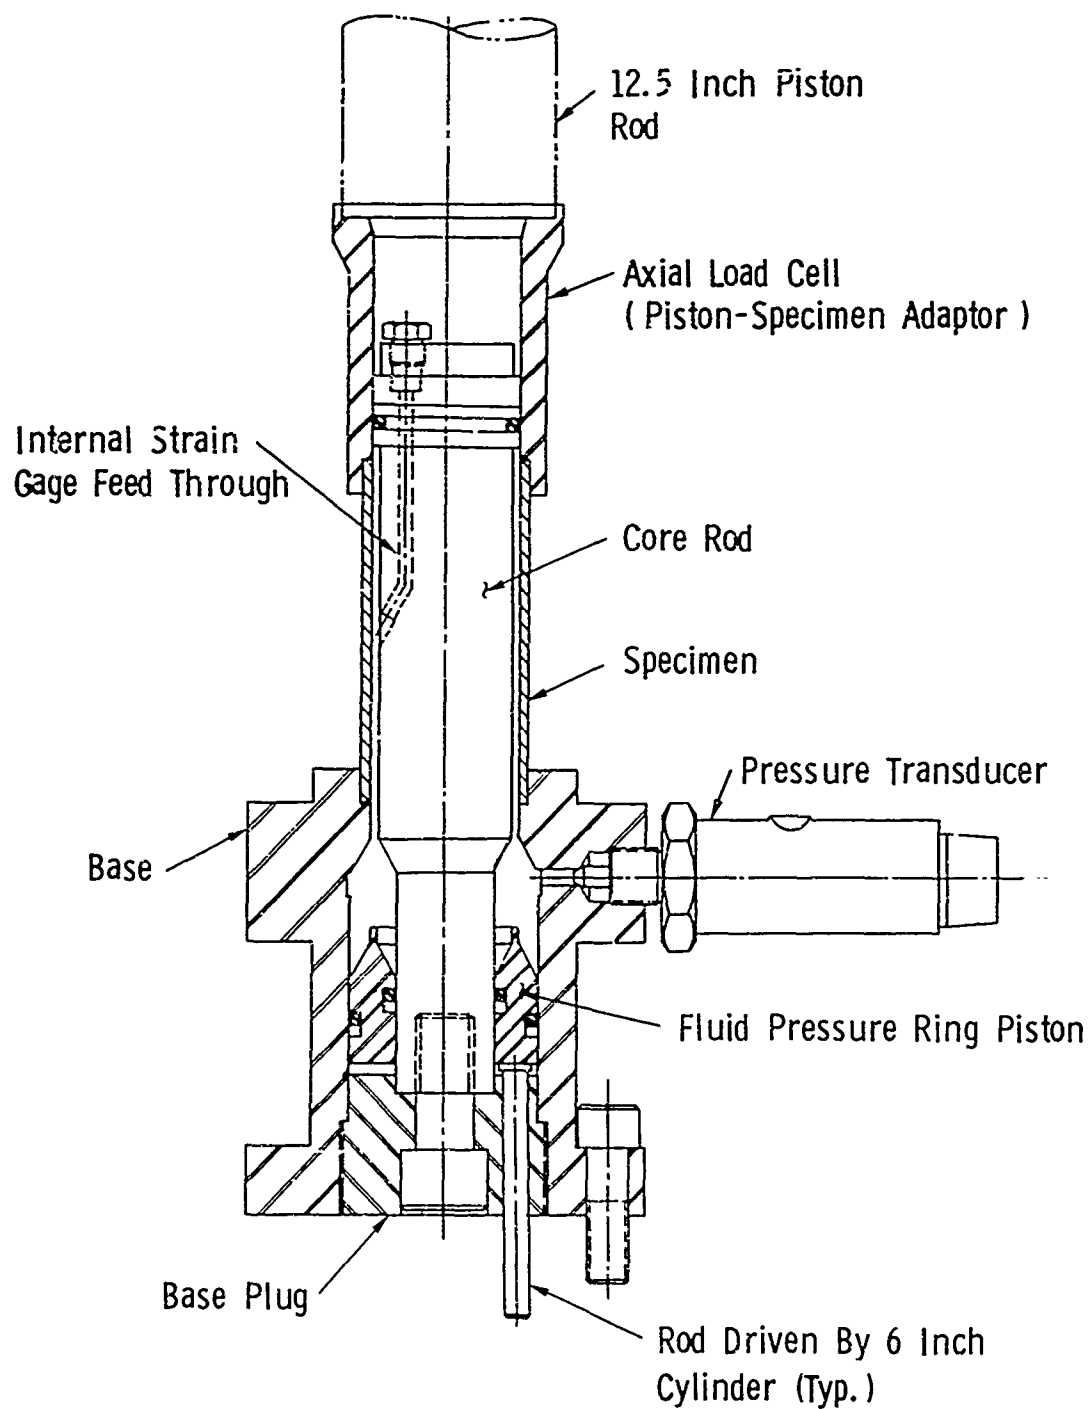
Sectional View of Specimen Package for Axial Compression and Circumferential Tension (Metallic Specimen)
